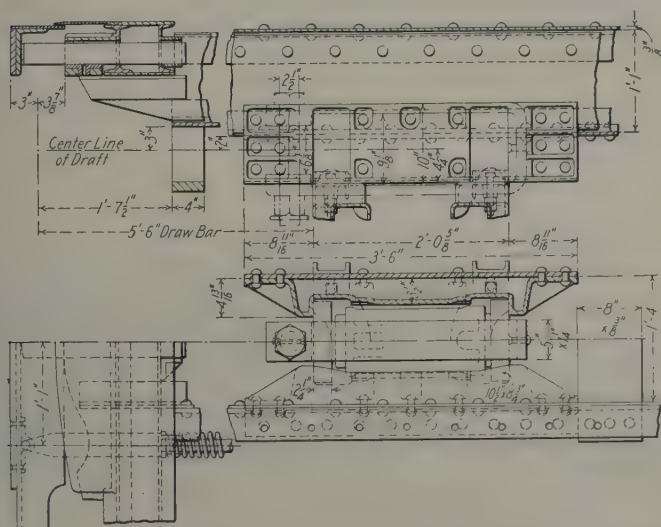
Miner Friction Draft Gear Class A-3-P as Applied to Passenger Equipment.
